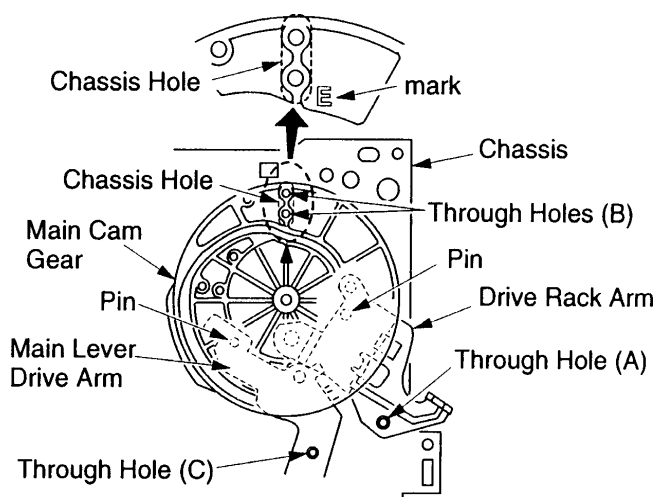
Main Cam Gear/Drive Rack Arm Alignment Procedure
